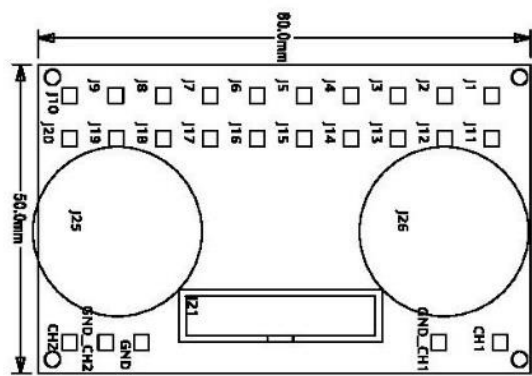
Oscilloscope Channel Selector Assembly diagram. PCB size 50 mm x 80 mm
